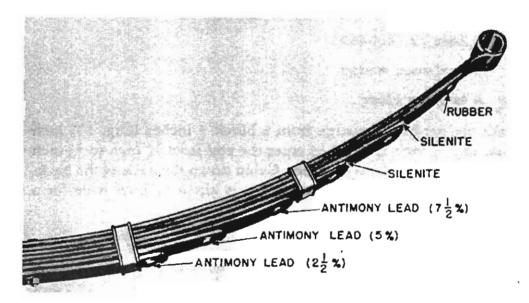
Correct Placement of Button Inserts in Insert Type Leaf Spring.
